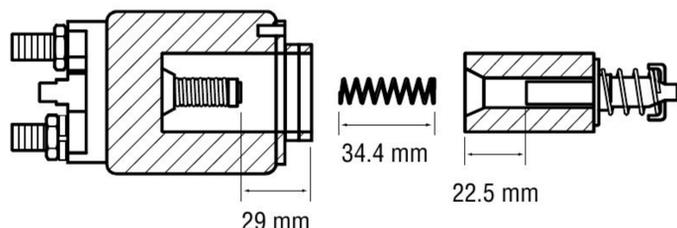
Bosch 402 series solenoids use two different movable-contact assemblies and plunger assemblies. These solenoids are interchangeable, but only as a complete assembly.
